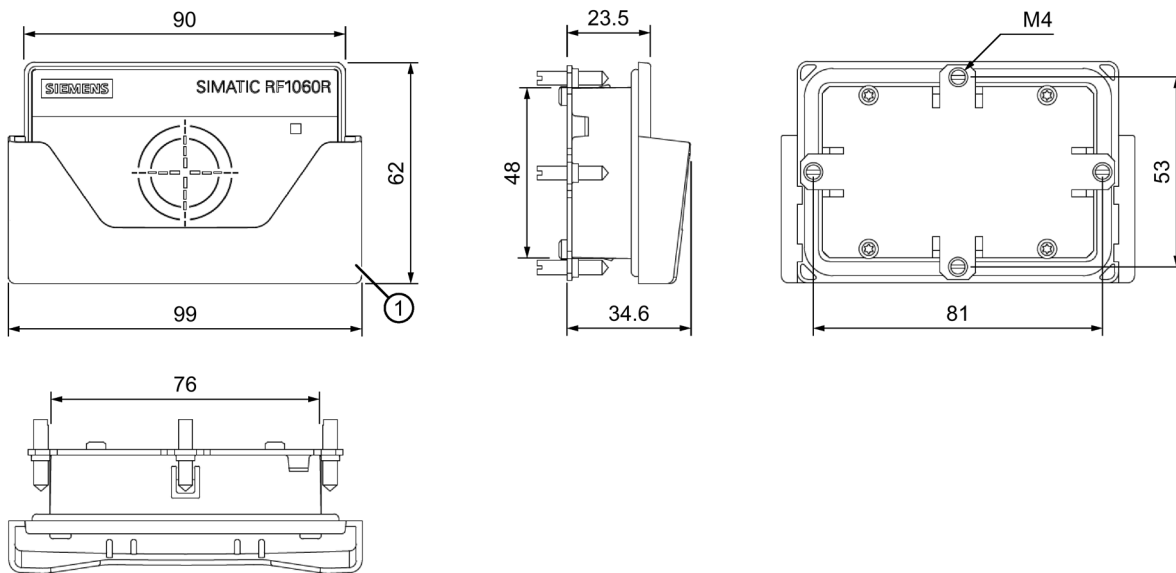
Dimension drawing SIMATIC RF1040R/RF1060R/RF1070R with optional card holder ①
